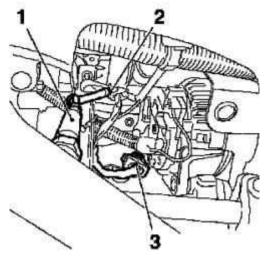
Disconnecting the supply of oxygen sensor catalytic converter: 1 - oxygen sensor catalytic converter, 2 - wire clamps, 3 - the wiring harness connector
